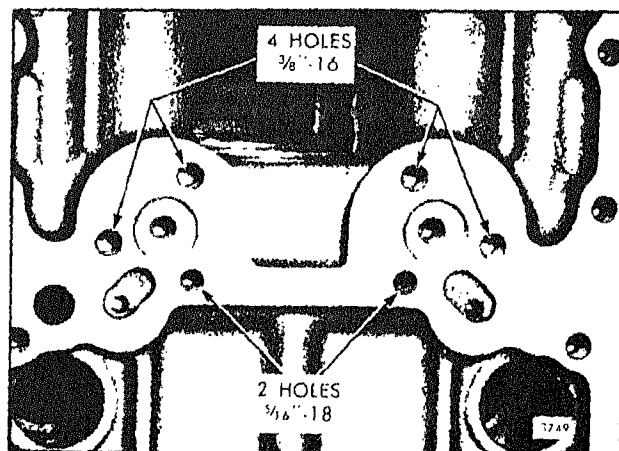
Location of the Four 3/8-16 Bolt Holes in Rear of Cylinder Block
